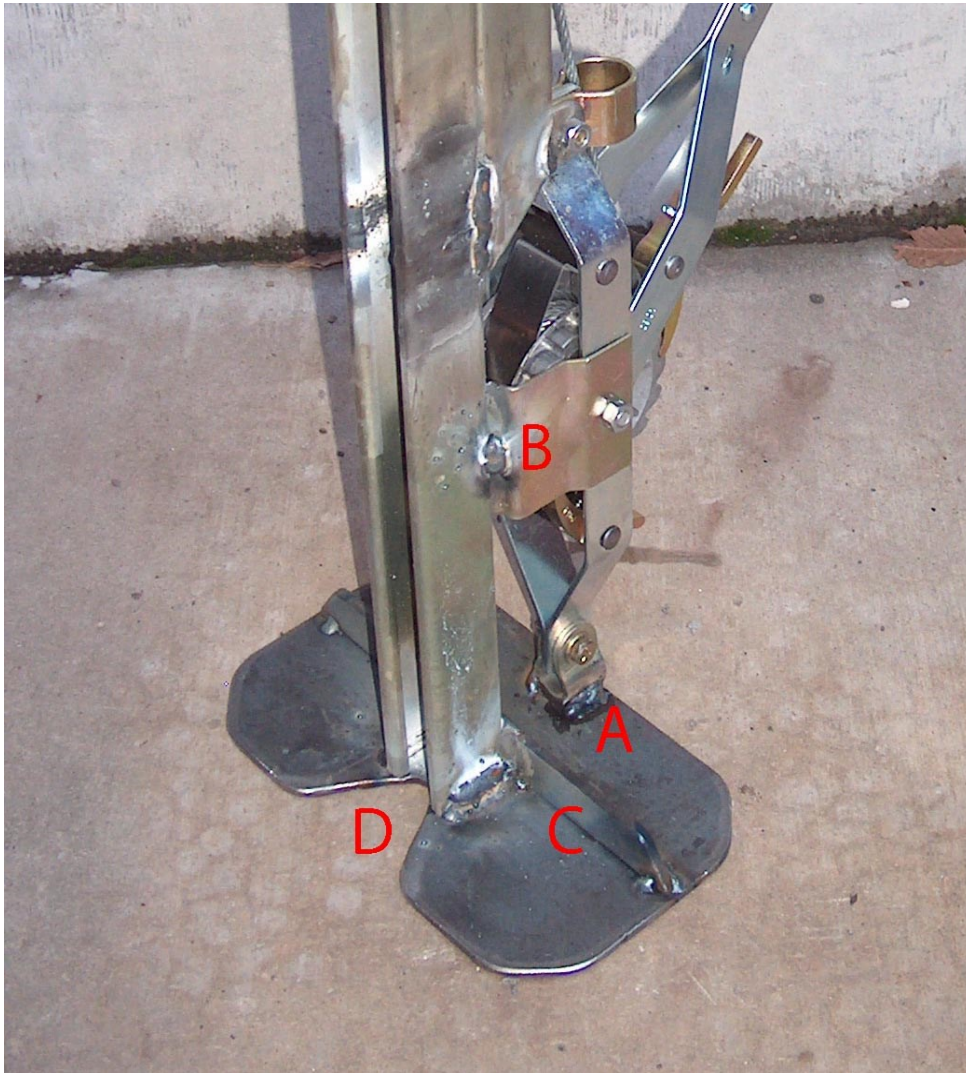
Foot detail. The brackets for mounting the winch (A) are made from cutting the winch hook swivels apart. The “C” shaped shell is welded to the puller frame (B) for additional stability. The foot is reinforced with a strap steel web (C). A “V” Is cut in the foot (D) to center the puller around the 2-meter probe to be pulled. Note the winch cable assembly was installed after welding.
